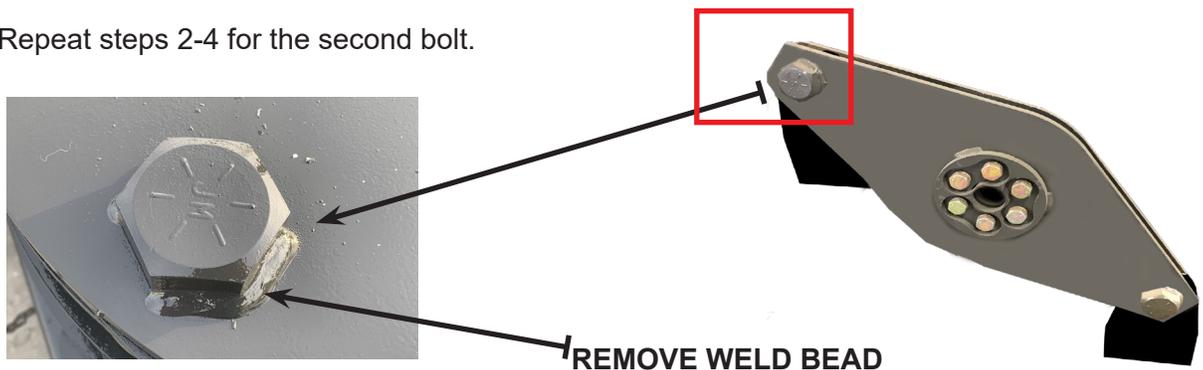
Blade Holder Bolt Weld Bead Removal
